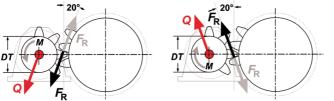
Loading the output shaft with a toothed gearwheel drive
